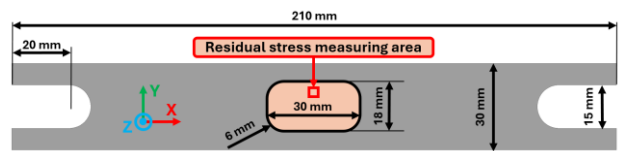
Machined pocket geometry (different depths) and residual stress measuring area.
